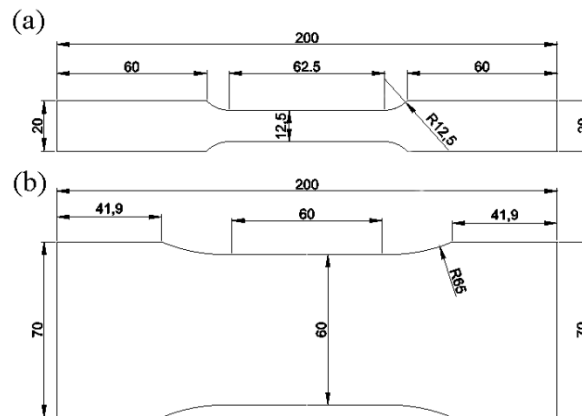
Geometric illustration (in mm) of specimens used in tensile tests (a) with standard gauge and (b) wide gauge
